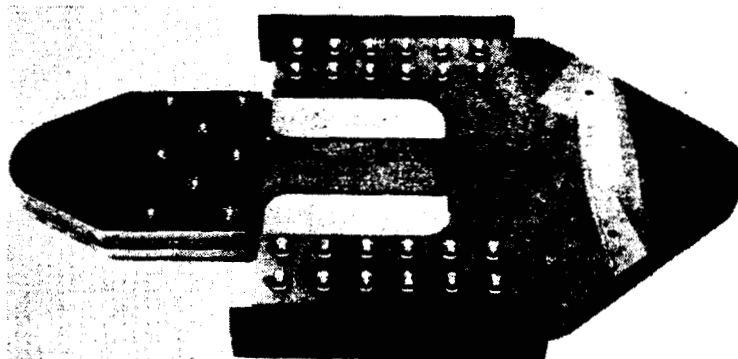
Web Splice Test Specimen and Fixture (122407B)
